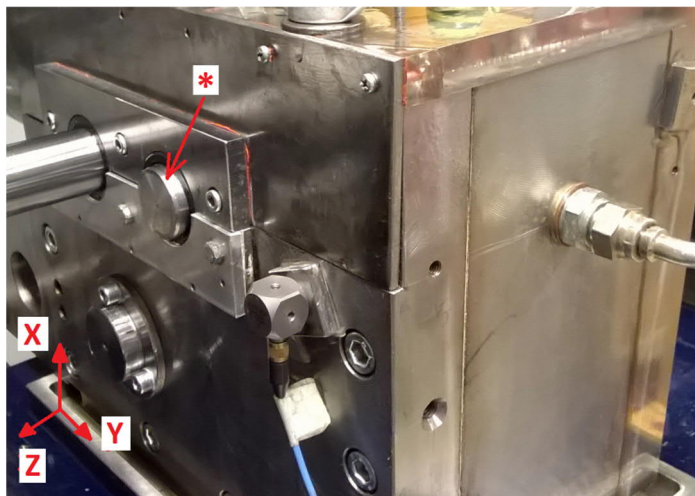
The accelerometer and the measurement directions. The observed bearing is on the sensor side of the frame assembled on the shaft marked *.
